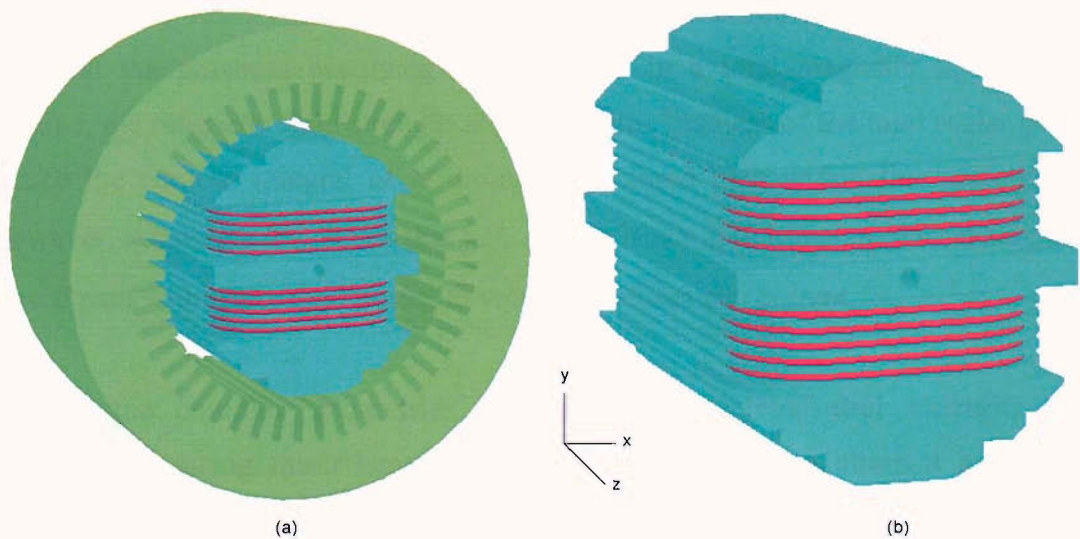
3D FE model of the HTS generator: (a) Rotor and stator, and (b) Rotor core with HTS field winding
